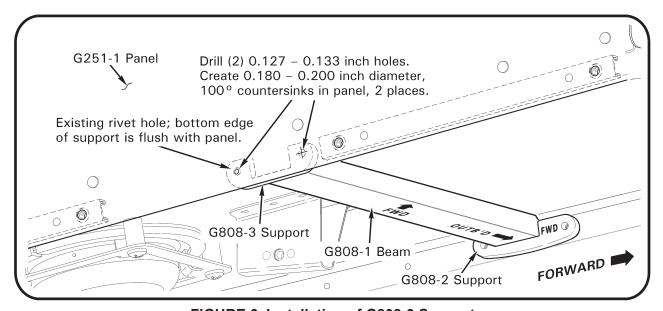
Installation of G808-3 Support (outboard-side of G251-1 panel; secures beam in place)
